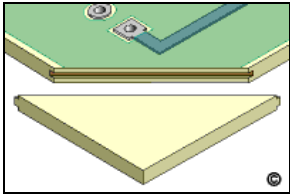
Check fit of new base material. The tongue must mate with the groove.
